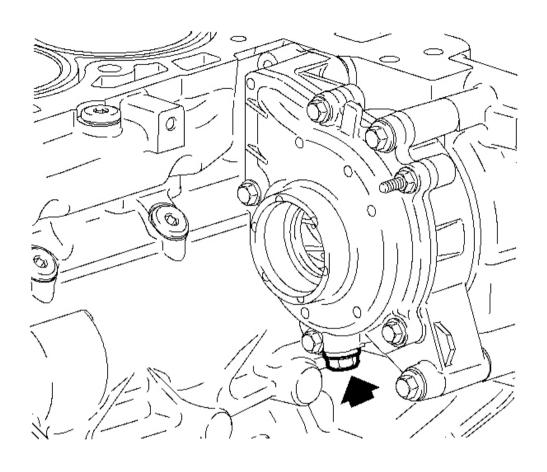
View Of Drain Plug On The Water Pump Assembly Courtesy of GENERAL MOTORS CORP.
